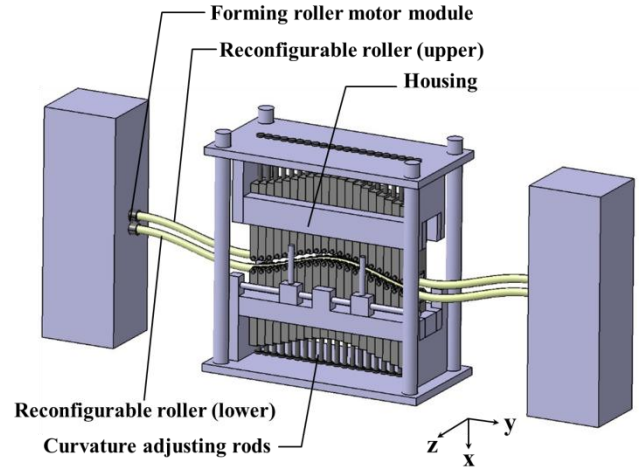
Schematic diagram of machine for flexibly-reconfigurable roll forming
